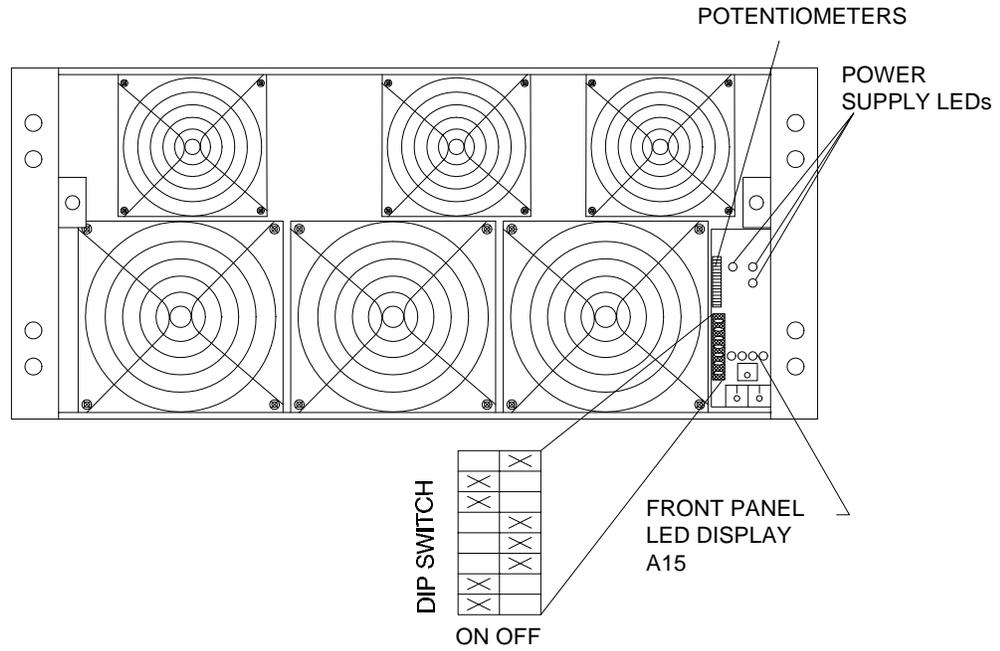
Dial Port Modem Assembly (Codex 226X) UD41A6 and Fan Assembly Controls and Indicators.
